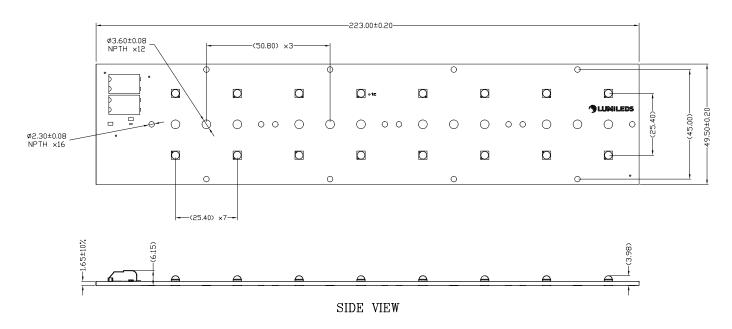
Mechanical dimensions for L213-xxxx016MDE001.
